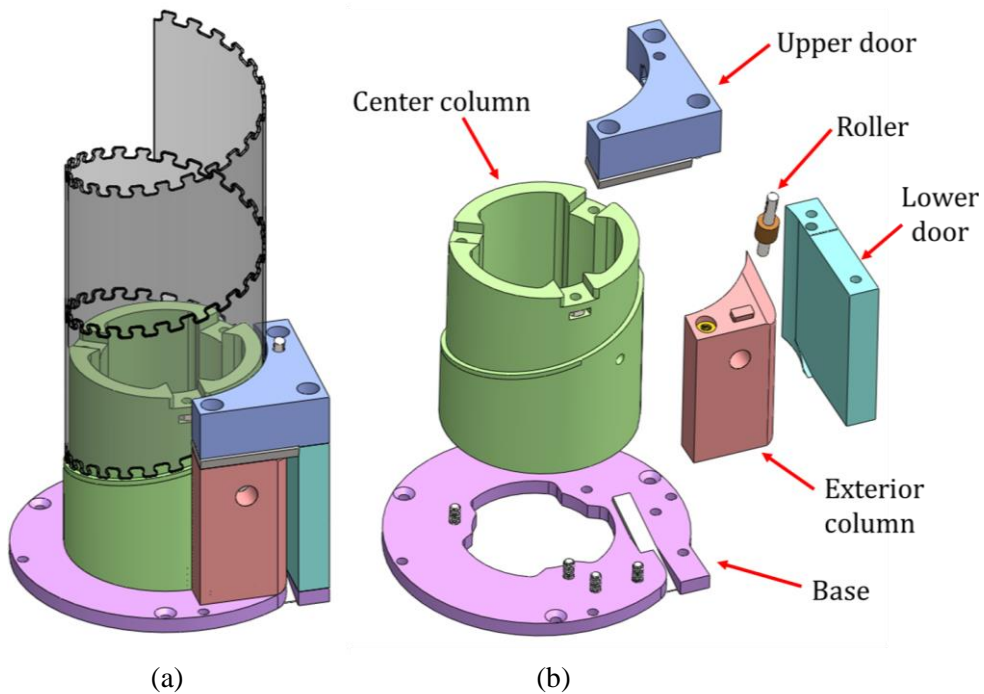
Design of Slider: (a) Assembled model with band, (b) Exploded view
